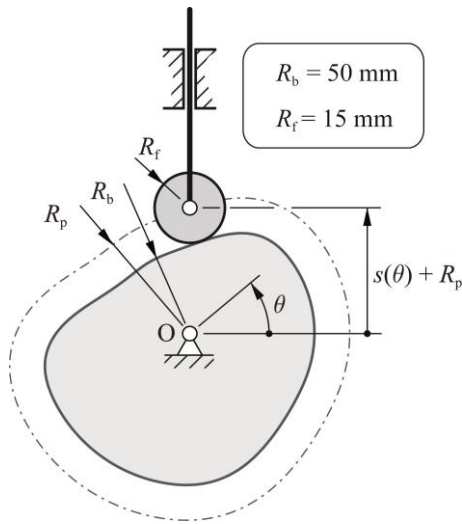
Cam-follower mechanism. Design geometrical parameters.
